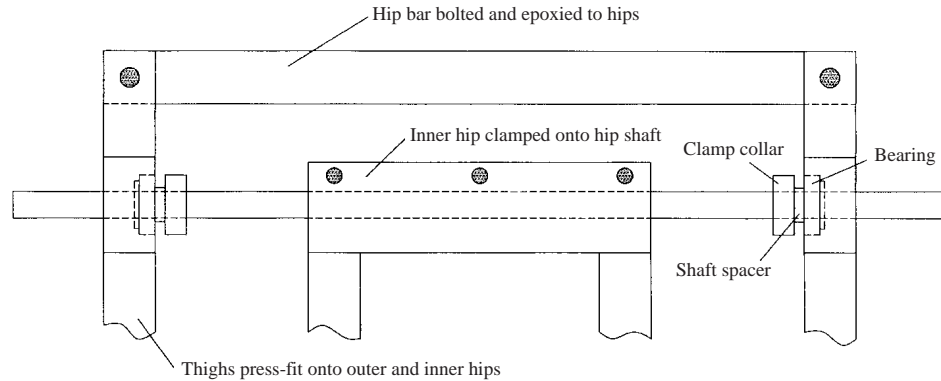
A CAD drawing of the inner and outer hip joints.
